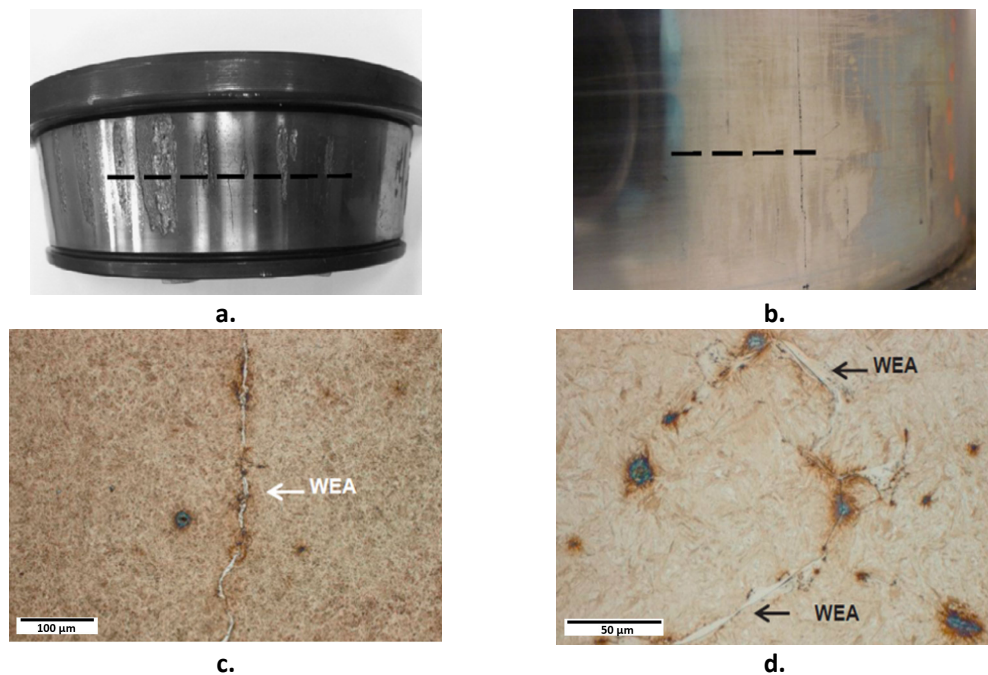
Damage produced by WSF in an AISI 52100 bearing inner race. The dotted lines in a) and b) indicate the cross sections showed by LOM in c) and d). The bearing in a) and c) has an outer diameter of 215 mm whilst the bearing in b) and d) has an inner diameter of 93 mm. Adapted from [48].
